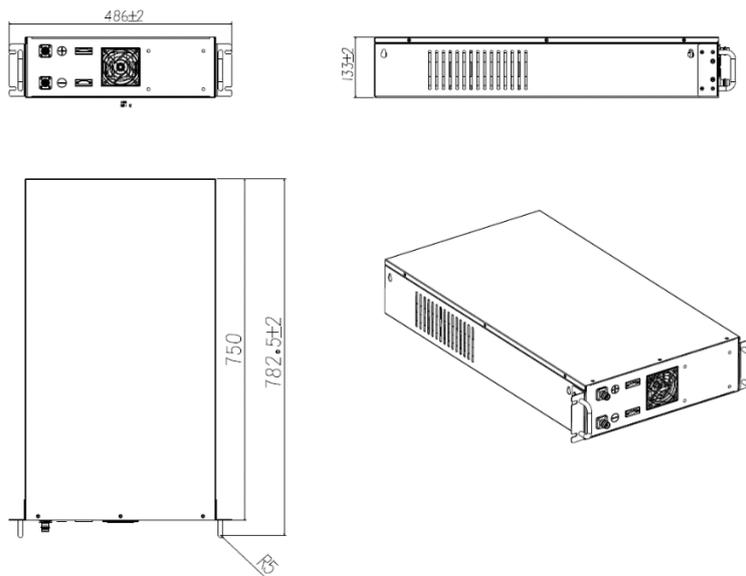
OBE7.6-R Battery Pack dimension drawing-2
